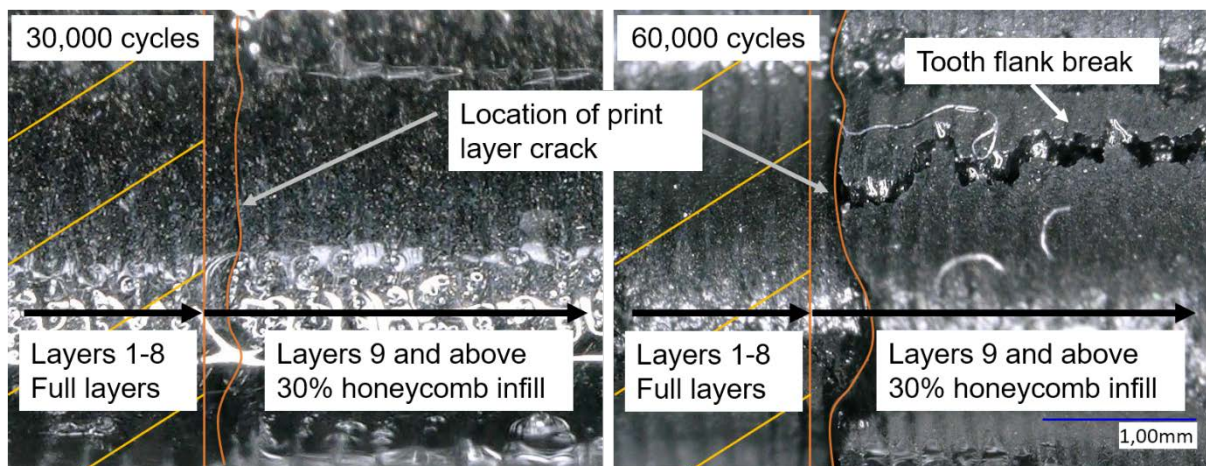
Print layer crack and tooth flank break in PEEK gear during run-in. The crack is located directly after the transition from fully printed infill layers to 30% honeycomb layers. The tooth flank break was caused by local increase of pressure due to missing support from the detached layers. On the left image, the oil diffusing from the crack is visible.
